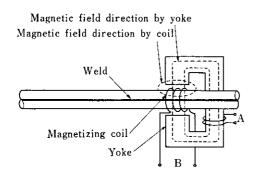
Schema of magnetic particle flaw detector for weld of ERW pipe
